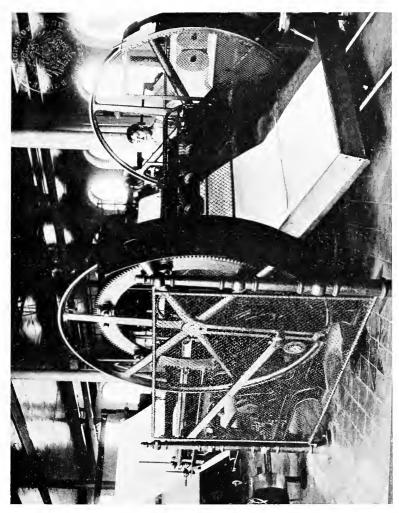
shows bolt cutter with guards over gears. Notice the complete enclosure of all dangerous moving parts, including the motor. The perforated metal guard over the motor insures adequate ventilation.
